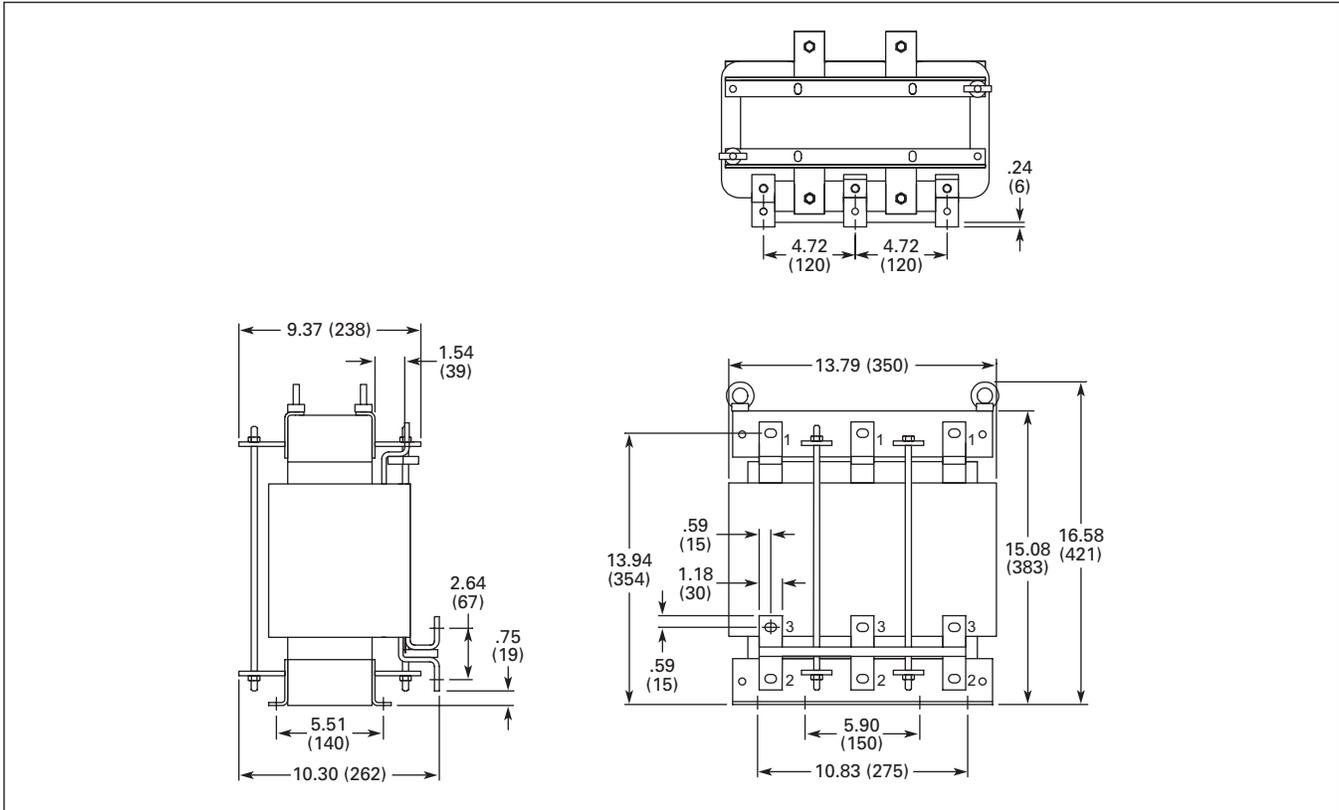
Dimensions of AC Choke CHK0400 in Inches (mm)
